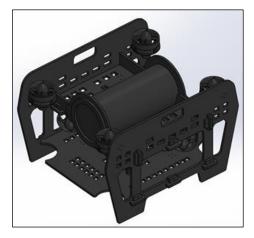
Complete vehicle assembly in SOLIDWORKS.
